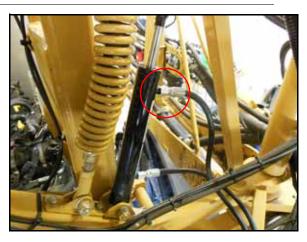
Hydraulic Hoses Installed on Left Cylinder
